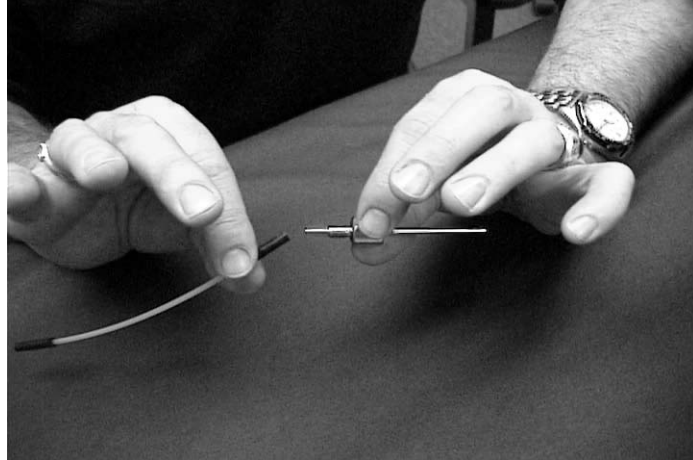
Removing the rubber sleeve from the Outflow Tube Assembly
